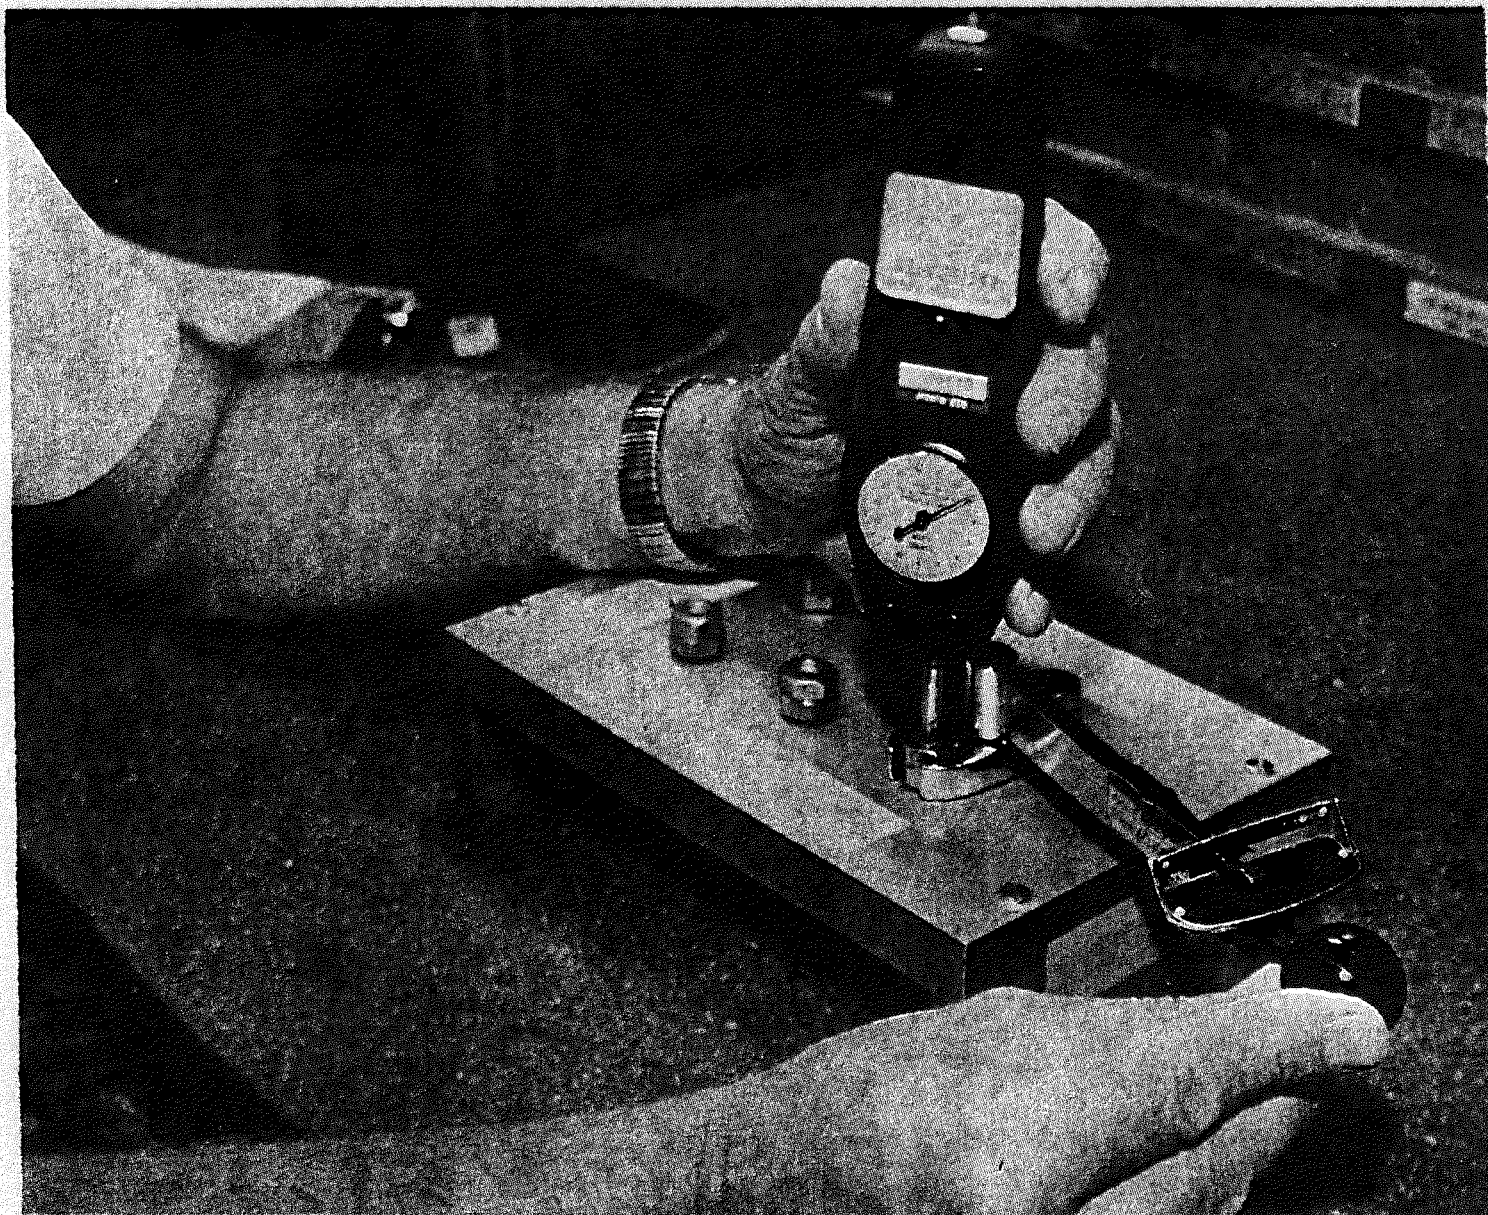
Spindle Release Force Test Set-up. (Ref. Test no. 6.6)
